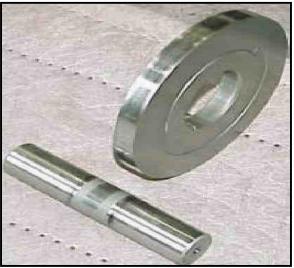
; Shows a 1" diameter specimen pin on the lower left and a 5" loading roller on the upper right side of the photograph.<sup>8, 13</sup>
